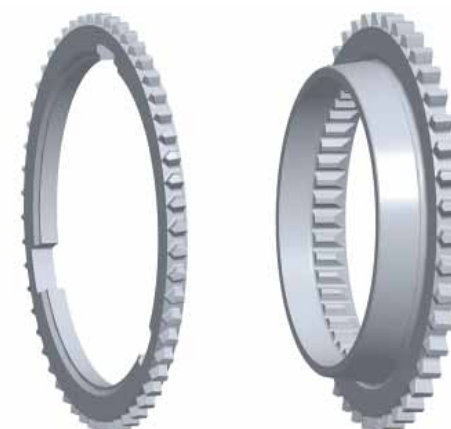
INA clutch body manufactured by forming – flat version (left), version with integrated inner cone (right)
